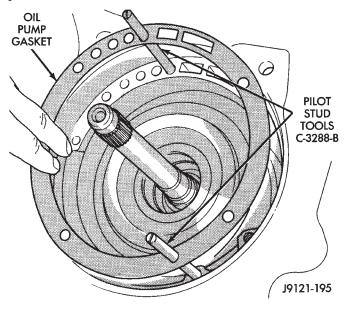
Installing Pilot Studs And Oil Pump Gasket
